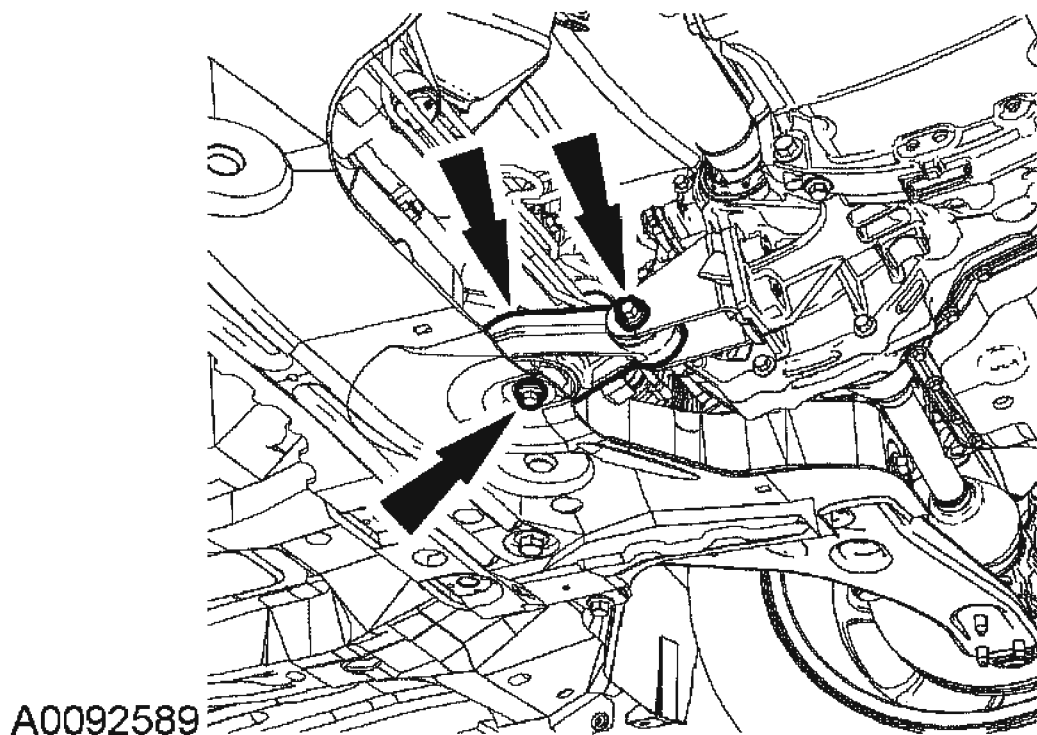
Removing Transaxle Roll Restrictor Bolts
